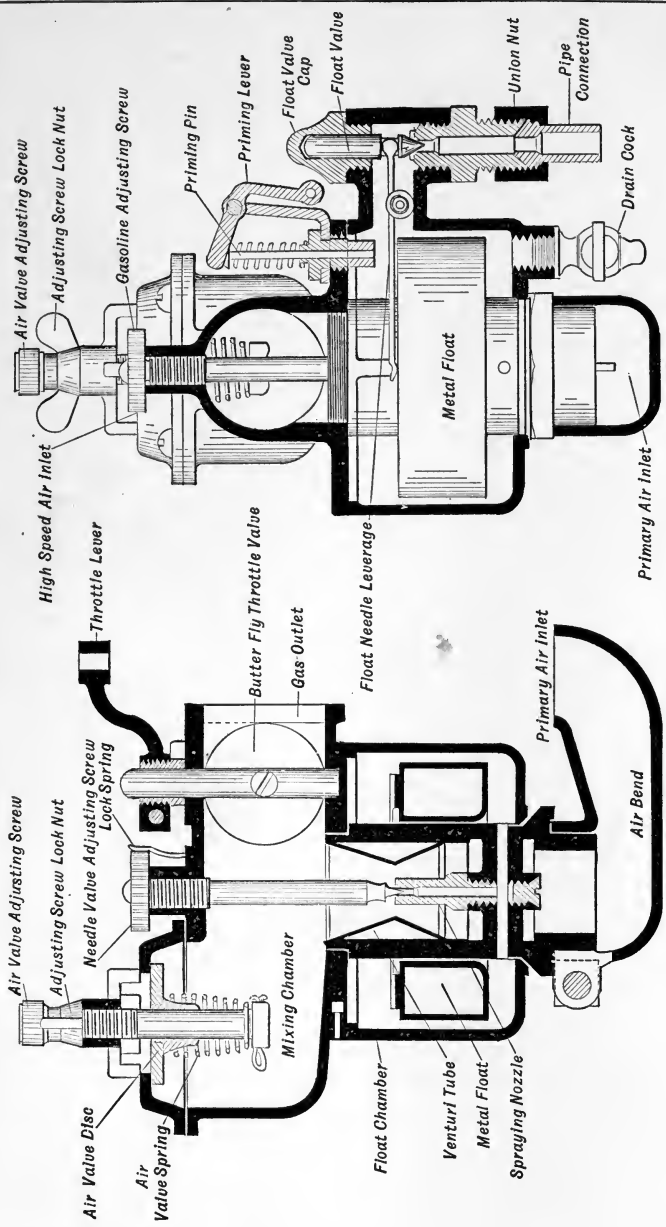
Showing Details of Breeze Carburetor, a Simple Automatic Instrument. Note Fuel-Adjustment Needle Valve Over Spray Nozzle.
